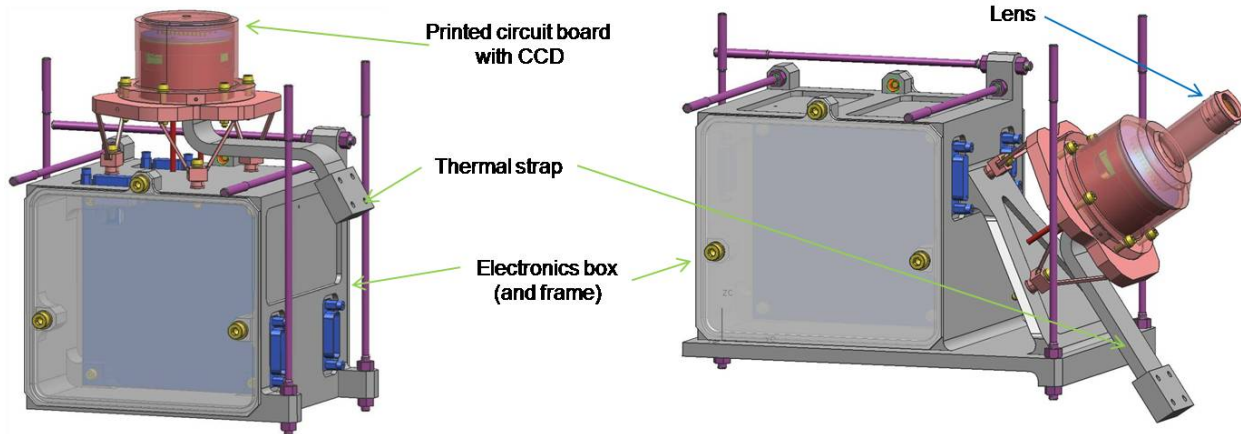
Left: A view of the angle tracker camera (ATC). Right: A view of the fringe tracker camera (FTC).
